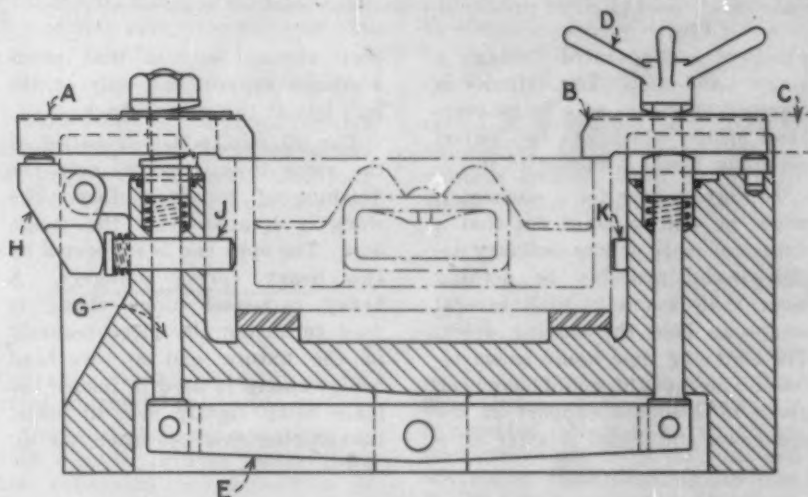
Sketch showing clamping of an oil pan for operation No. 2.
